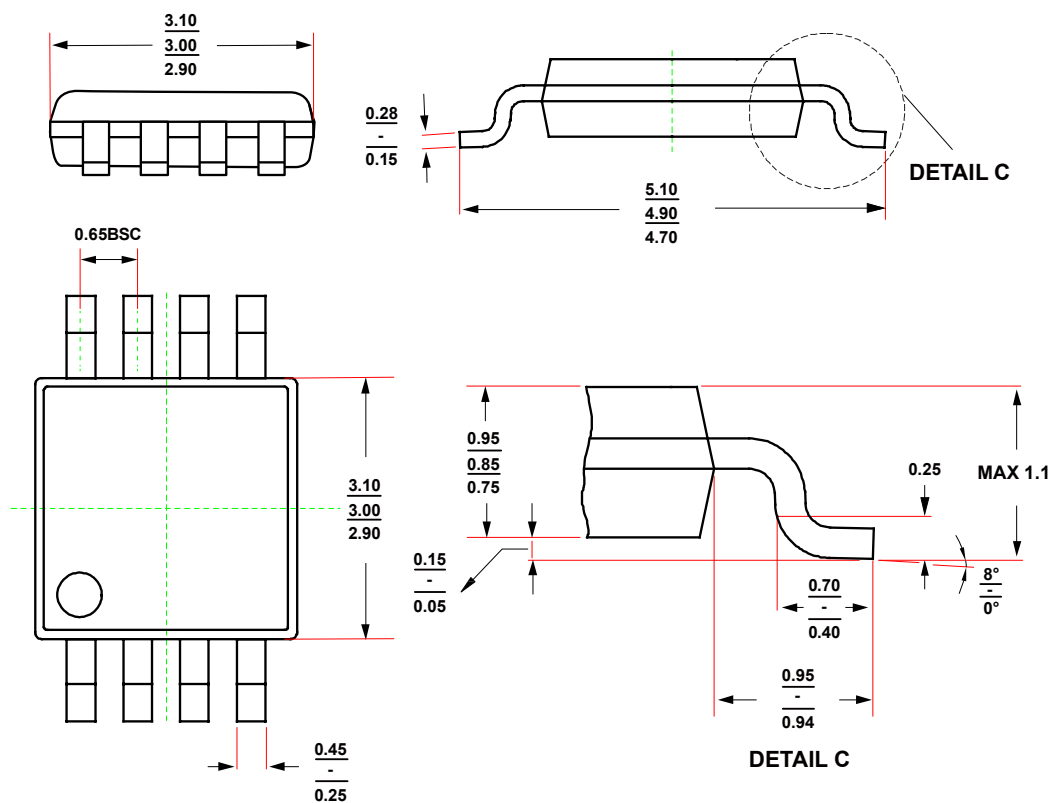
8-Lead MSOP Package Dimensions shown in millimeters
